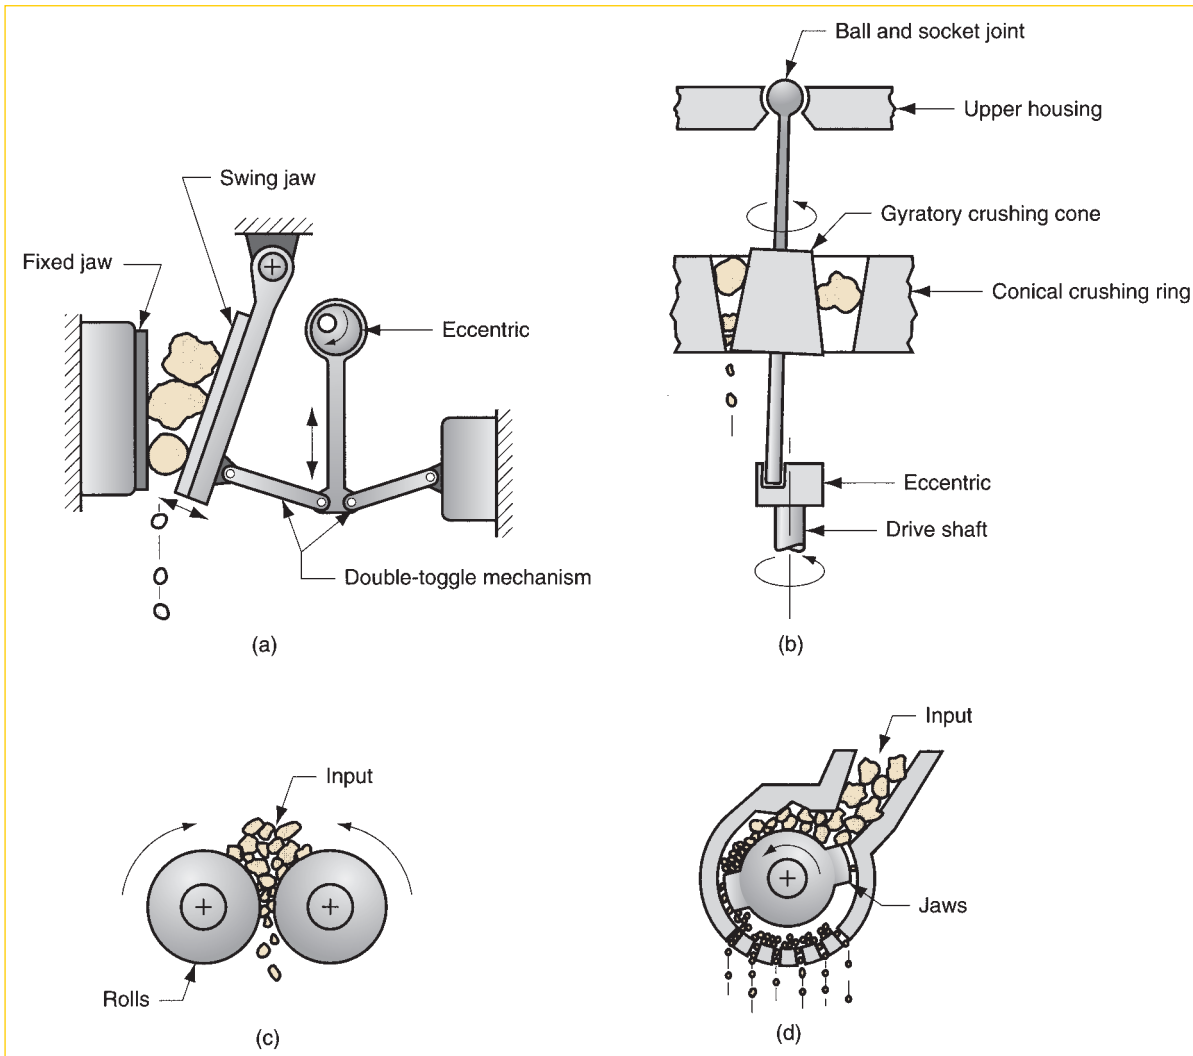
Crushing operations: (a) jaw crusher, (b) gyratory crusher, (c) roll crusher, and (d) hammer mill.
